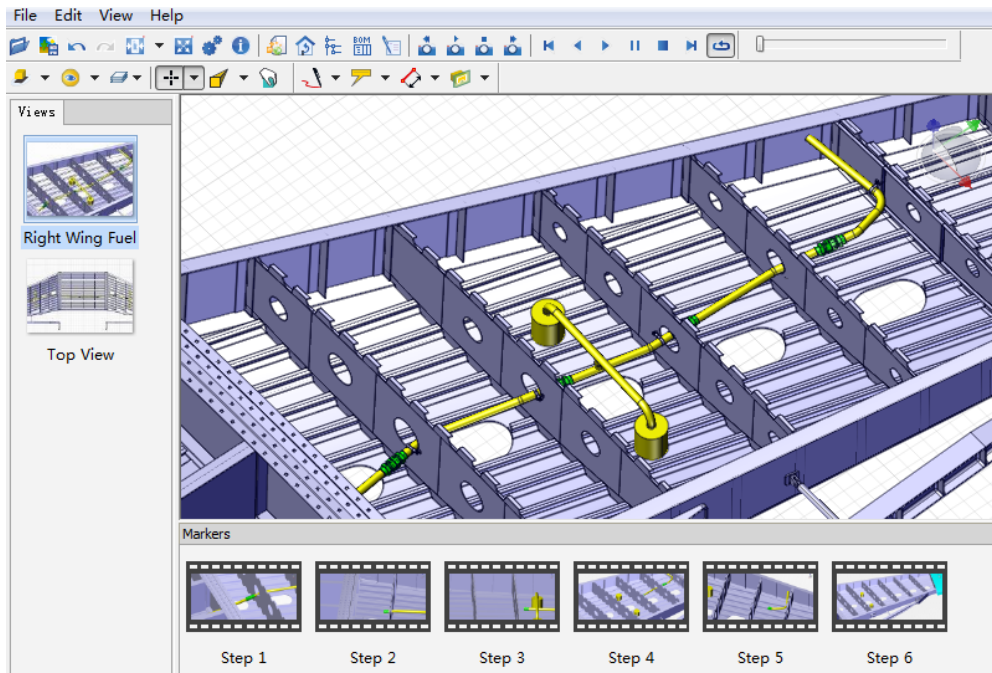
3-D Assembly Process Plans Playing in 3DVIA Player Tool
